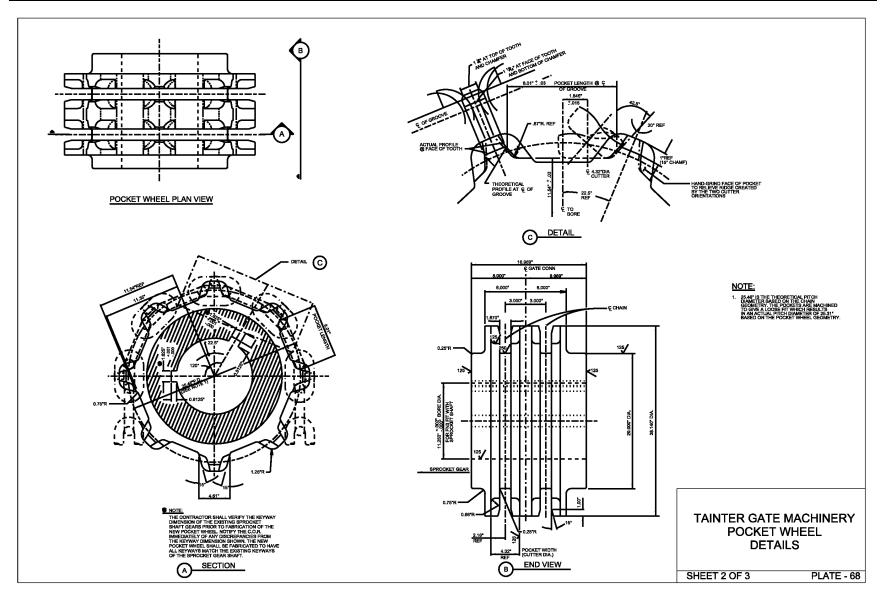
Plate 68: Tainter gate machinery, pocket wheel, details (sheet 2 of 3)
